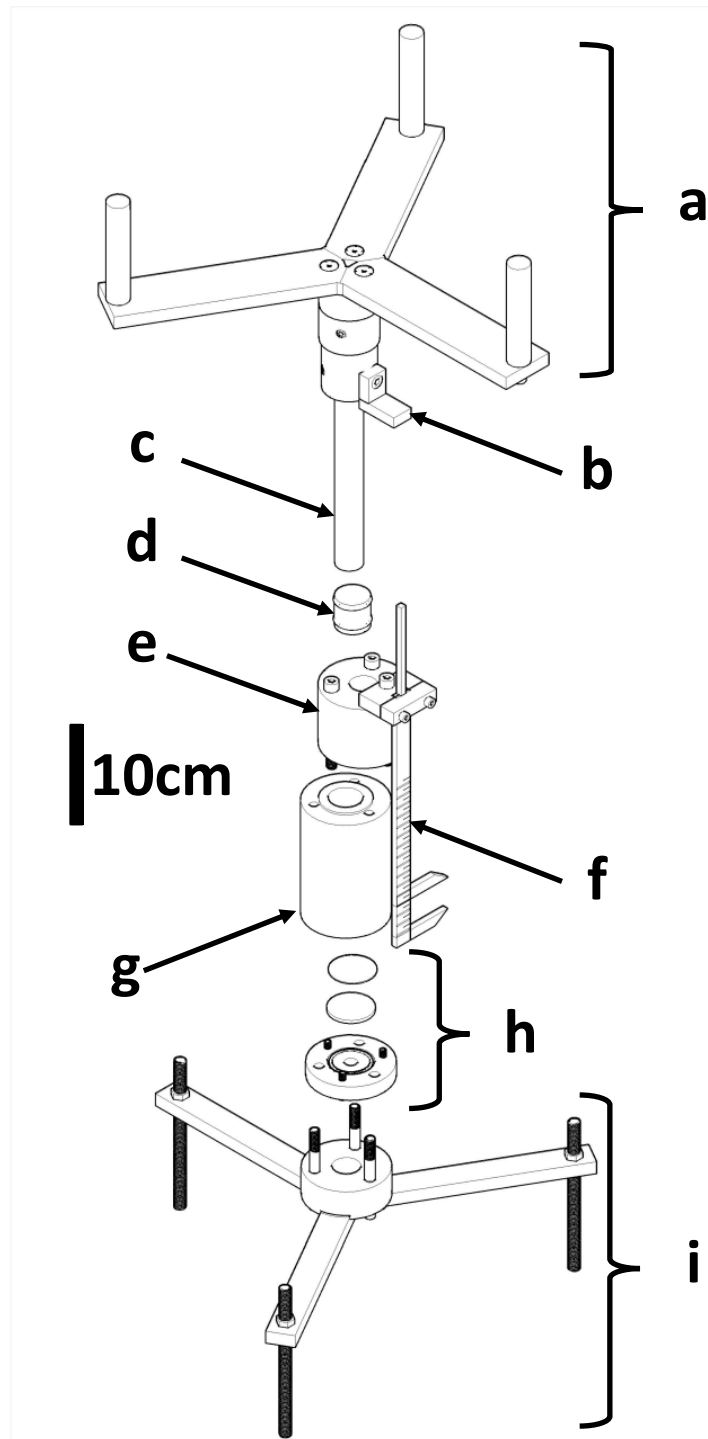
Schematic diagram of bench filter press. a, barrel assembly; b, digital calliper stop; c, plunger; d, piston; e, plunger guide; f, digital calliper; g, piston cylinder; h, filter assembly; i, support tripod assembly.
